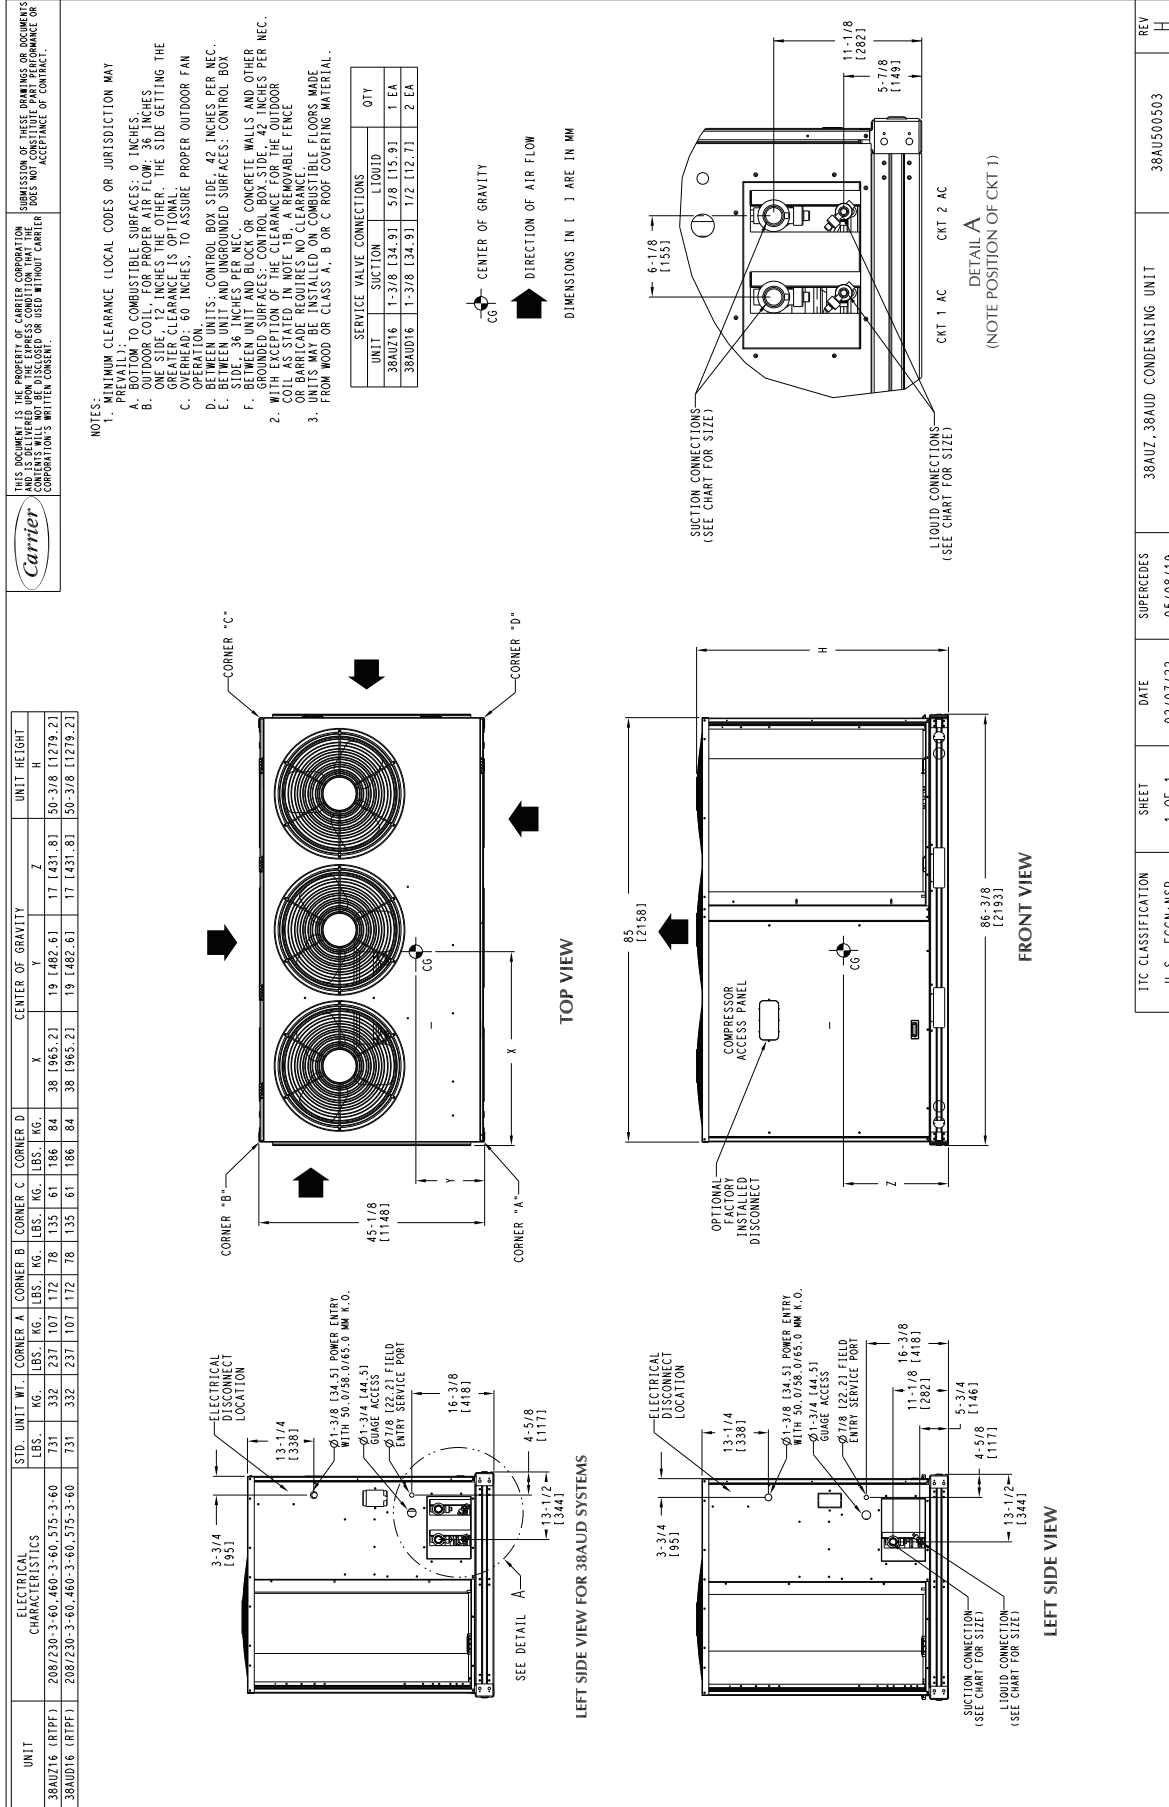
38AUD/Z 16 Base Unit Dimensions
